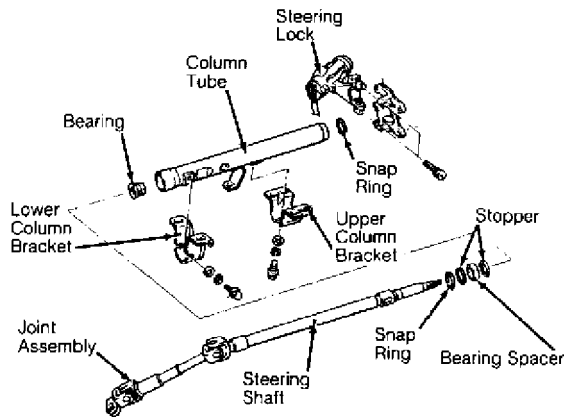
Exploded View of Steering Column Assembly (Colt, Colt 200, Mirage & Summit Non-Tilt; Tilt Models Are Similar)
